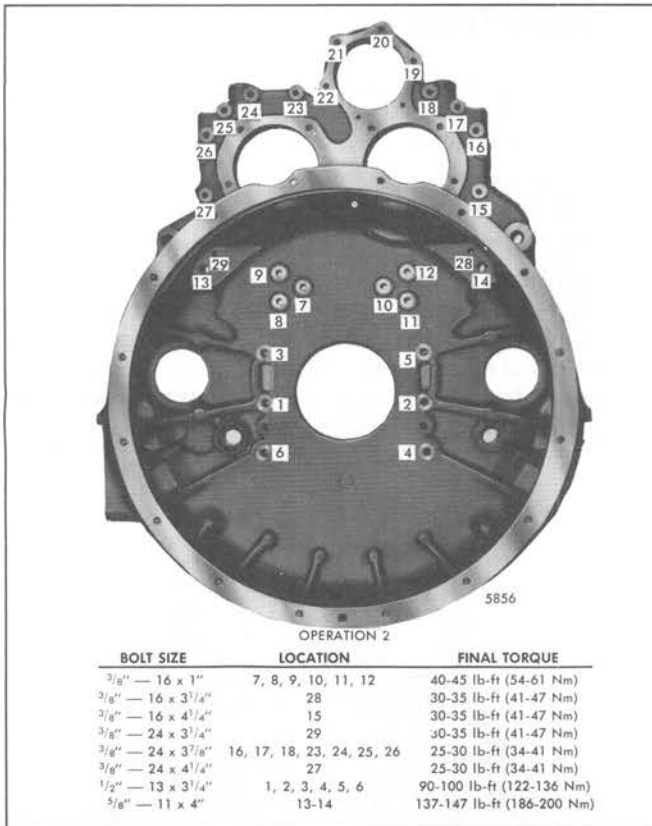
Flywheel Housing Bolt and Nut Final Tightening Sequence
